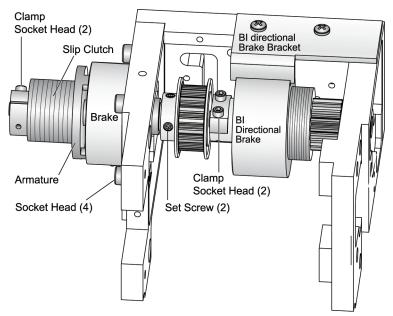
Slip Clutch, Brake/Armature and Bi-Directional Brake
